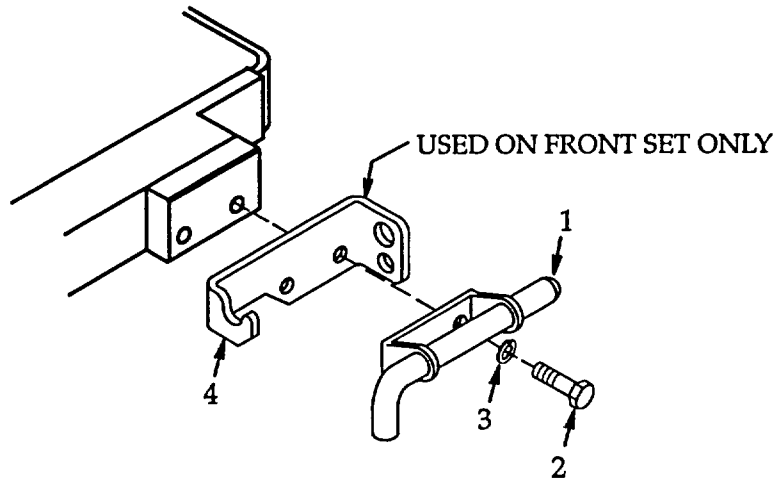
Latch Hinge and Latch Hinge Doubler.
